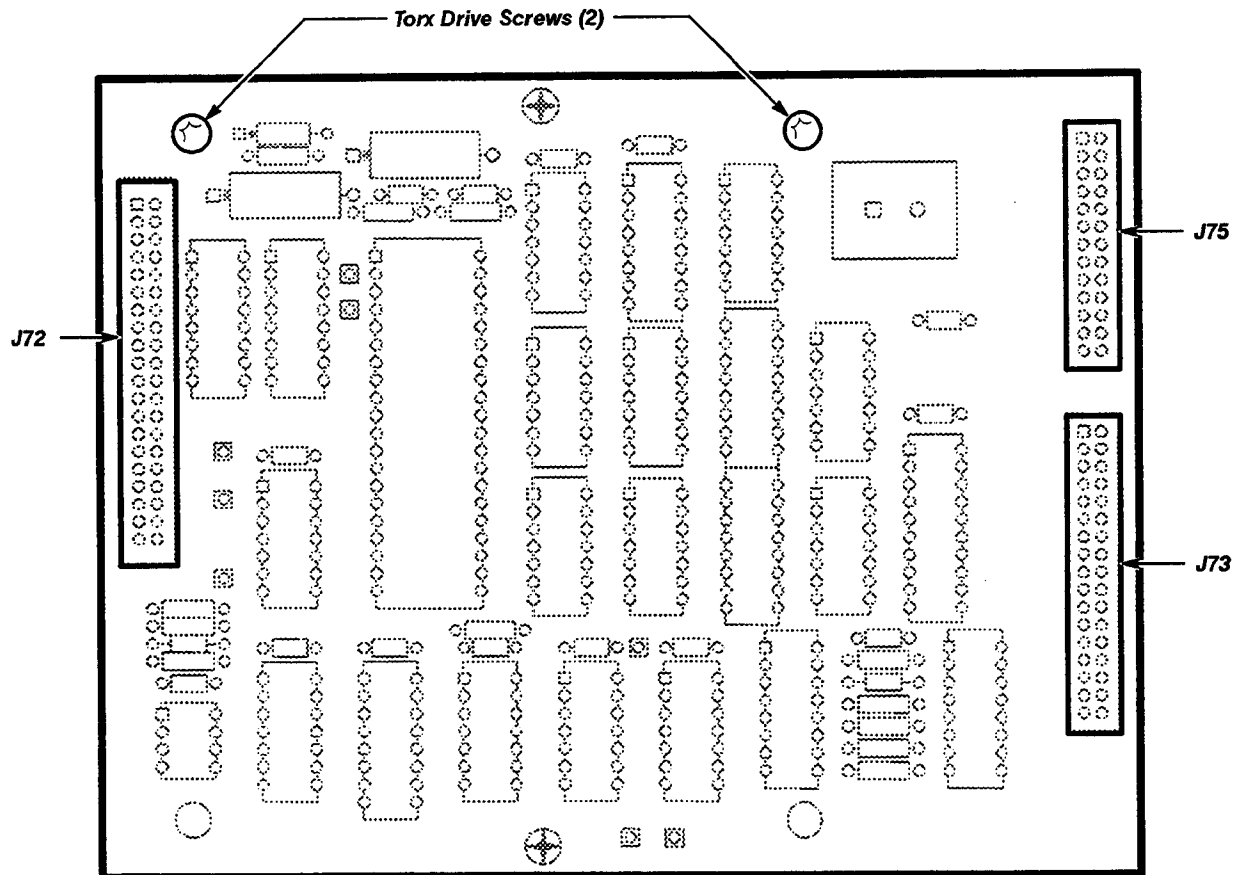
Removing/Replacing the A10 Front Panel Control Board
